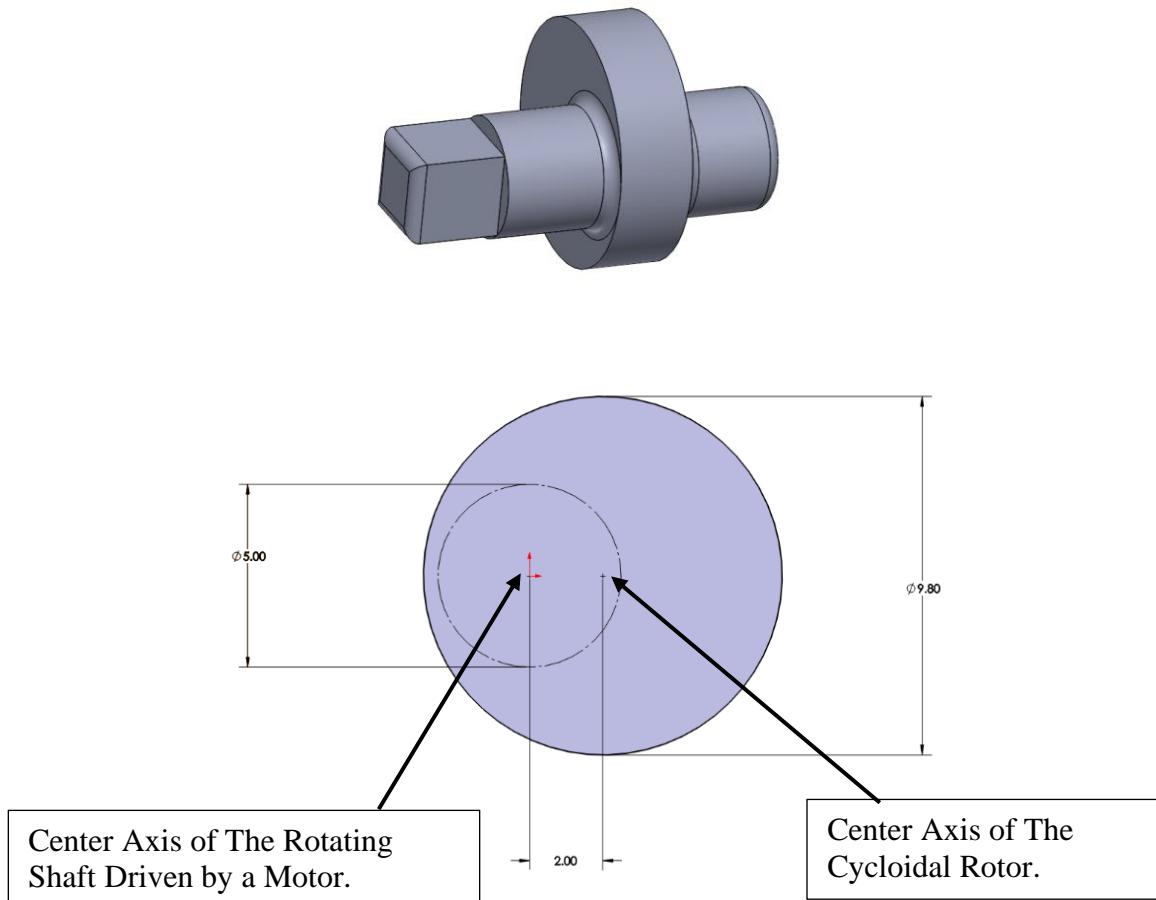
Representation of center axis of the rotating shaft driven by the motor and the center axis of the cycloidal rotor.
